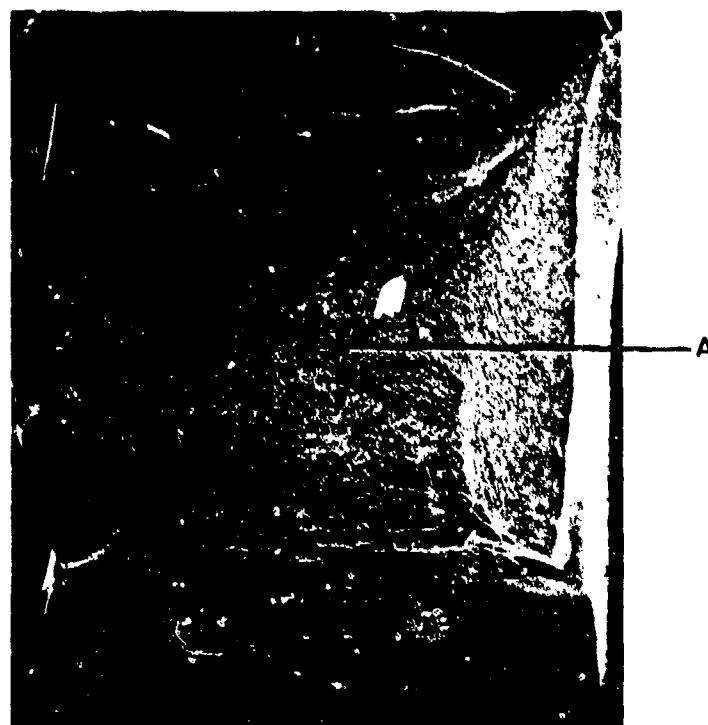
Fracture surface of an A-514 weld Charpy specimen tested at room temperature, 8x.
